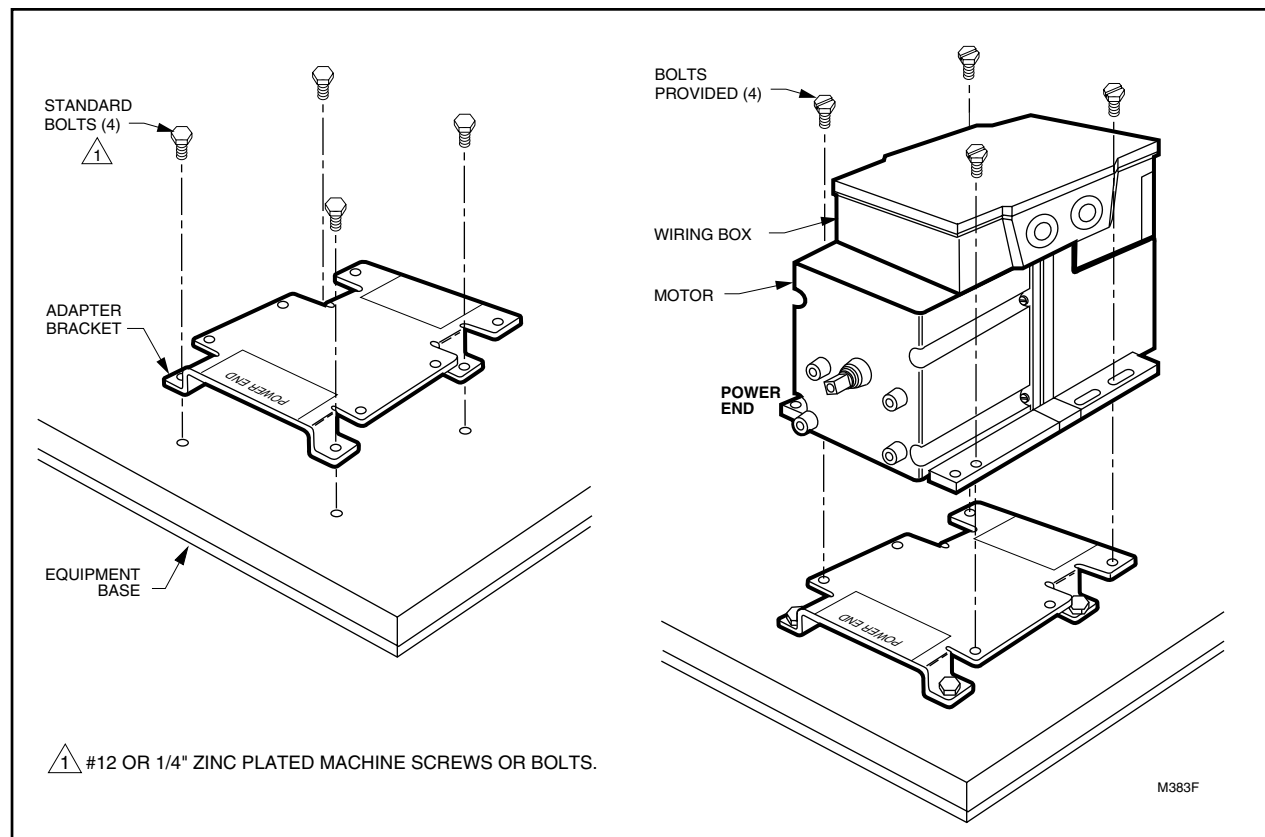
MOUNTING MOTOR WITH ADAPTER BRACKET.
